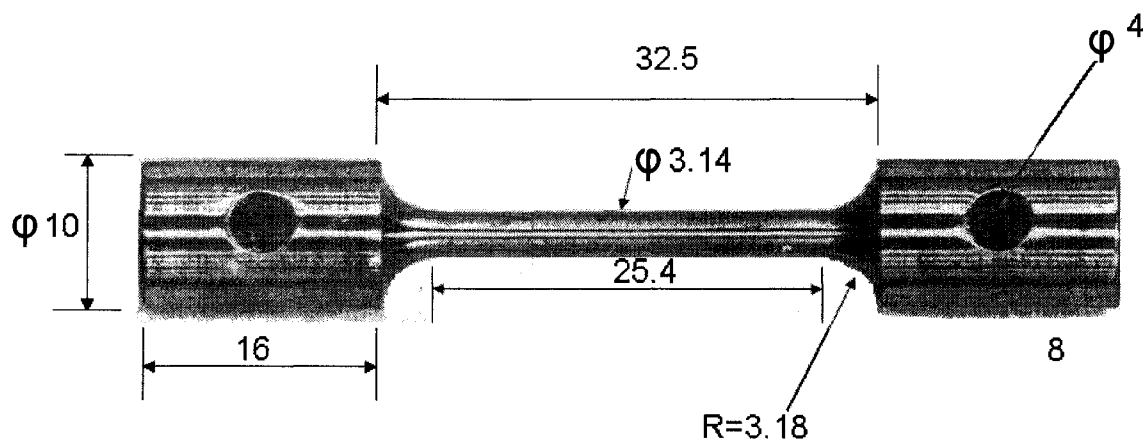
Diagram and dimension of SSRT test specimen (All dimensions are in mm)
